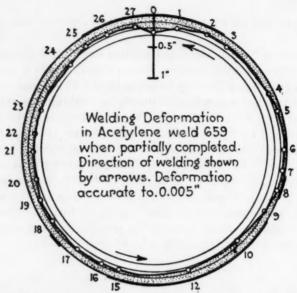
DEFORMATION DUE TO GIRTH WELD IN A 65-INCH PIPE LINE
